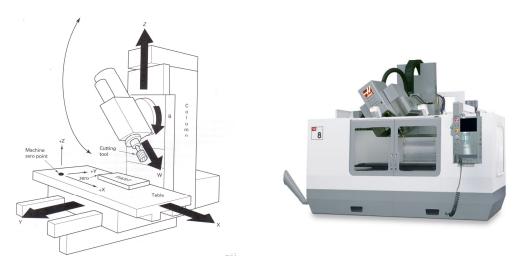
Schematic of typical 5-axis CNC machine<sup>1</sup> and machine center<sup>2</sup> used in manufacturing.
